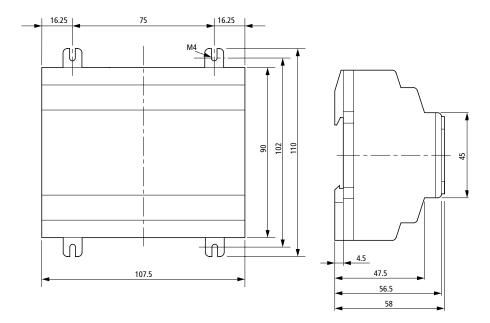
Dimensions of EZ700 in mm (for dimensions in inches see table 34)
